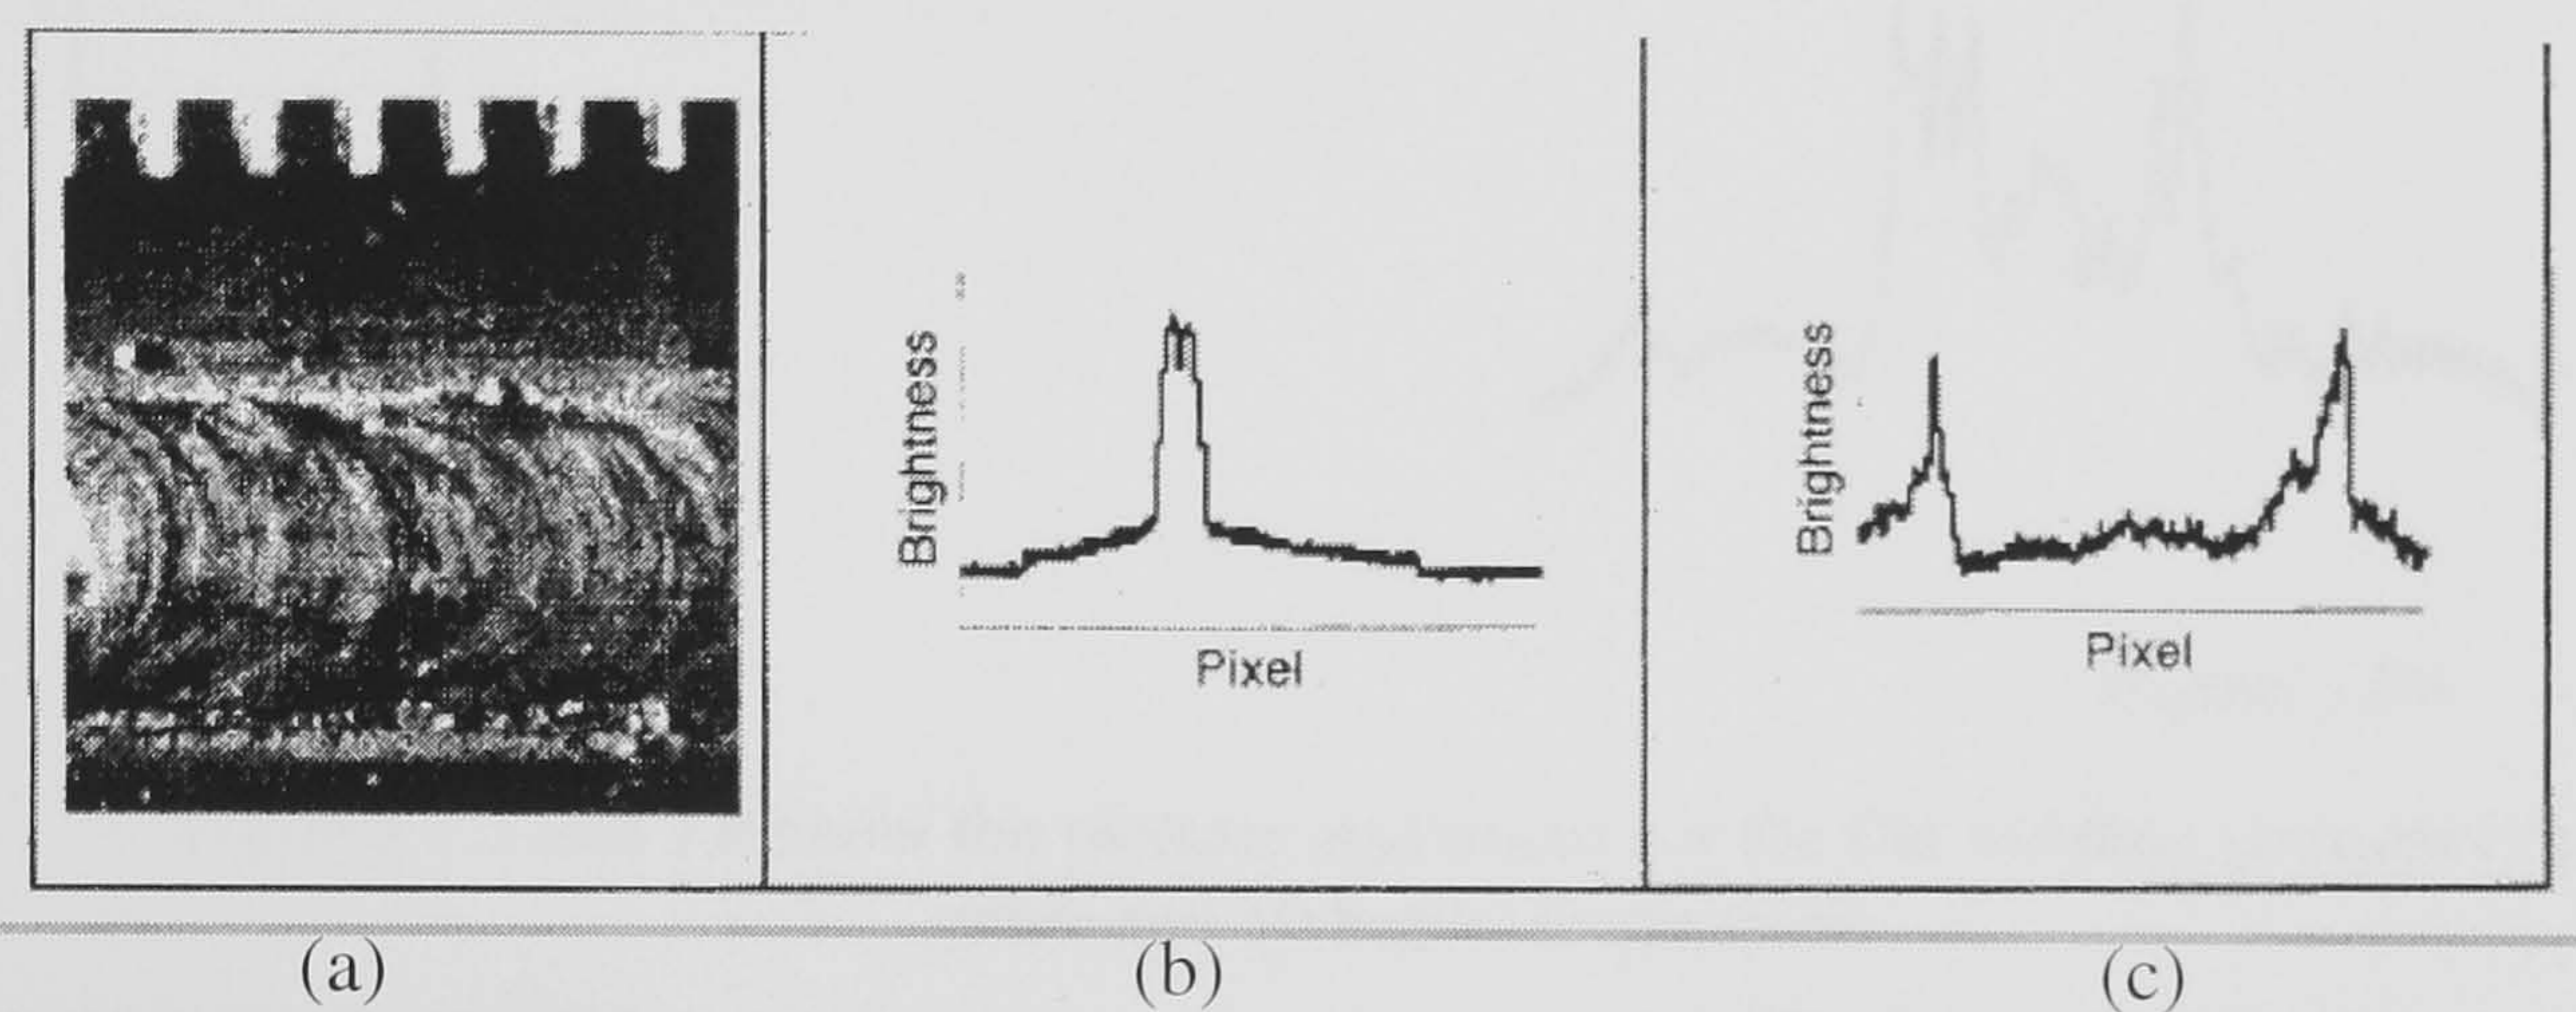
shows typical results of CO₂ laser welds; (a) the weld appearance of CO₂ laser weld, (b) the trace captured by the single line detector and (c) the trace captured by the CCD camera.
